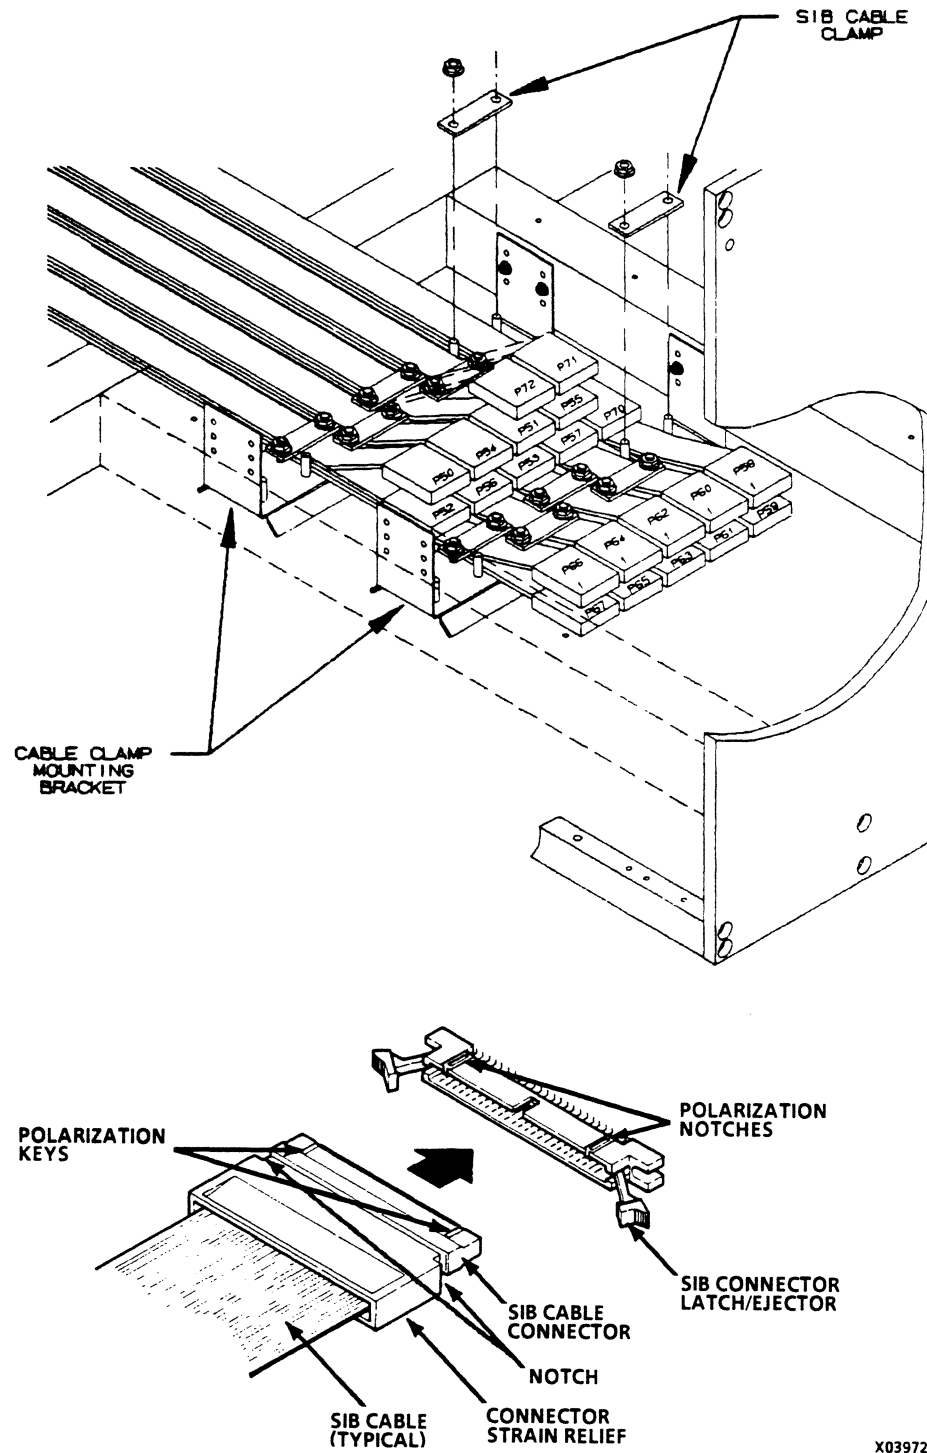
SIB Cable Clamps and Mounting Brackets
